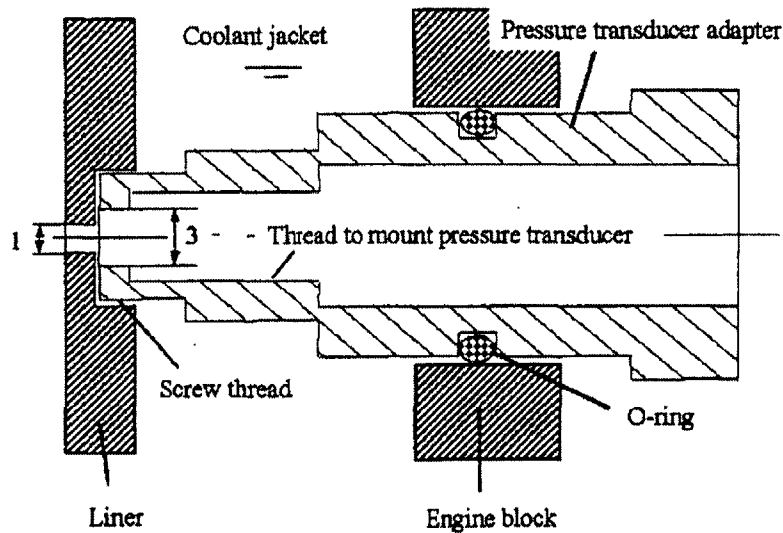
Side view schematic of engine with mounted pressure transducer adapter. Reprinted from [7].
